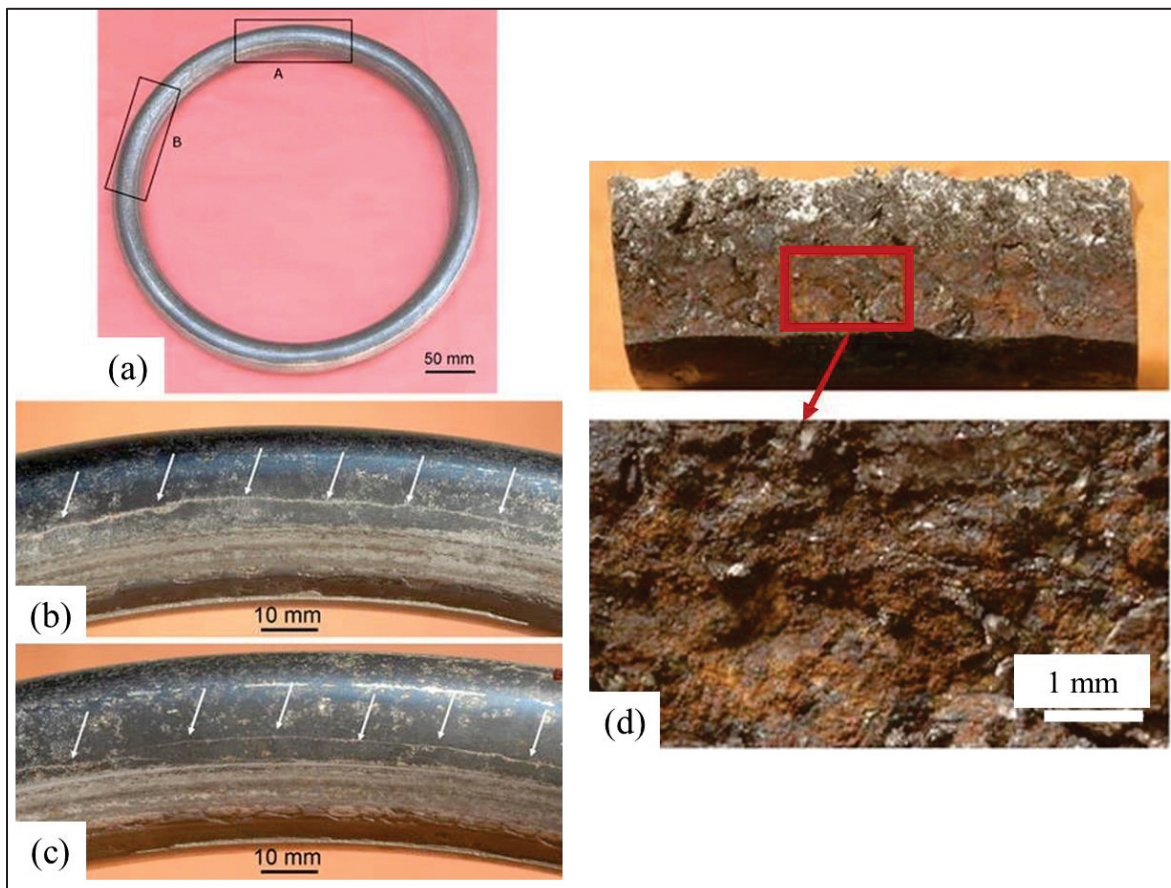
Ring gasket: (a) overall view of the failed gasket; (b) and (c) close-up views of regions A and B, which reveal cracks; (d) fracture surface of the ring gasket displaying a thick layer of oxides and/or corrosion products
